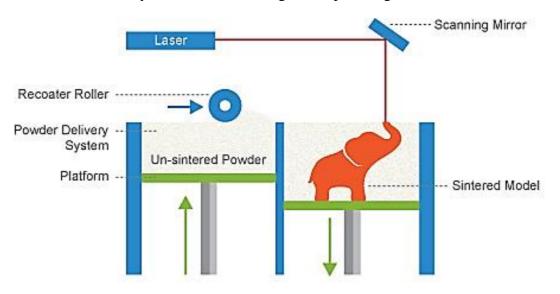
Selective Laser Sintering (Printspace3D, 2012)
